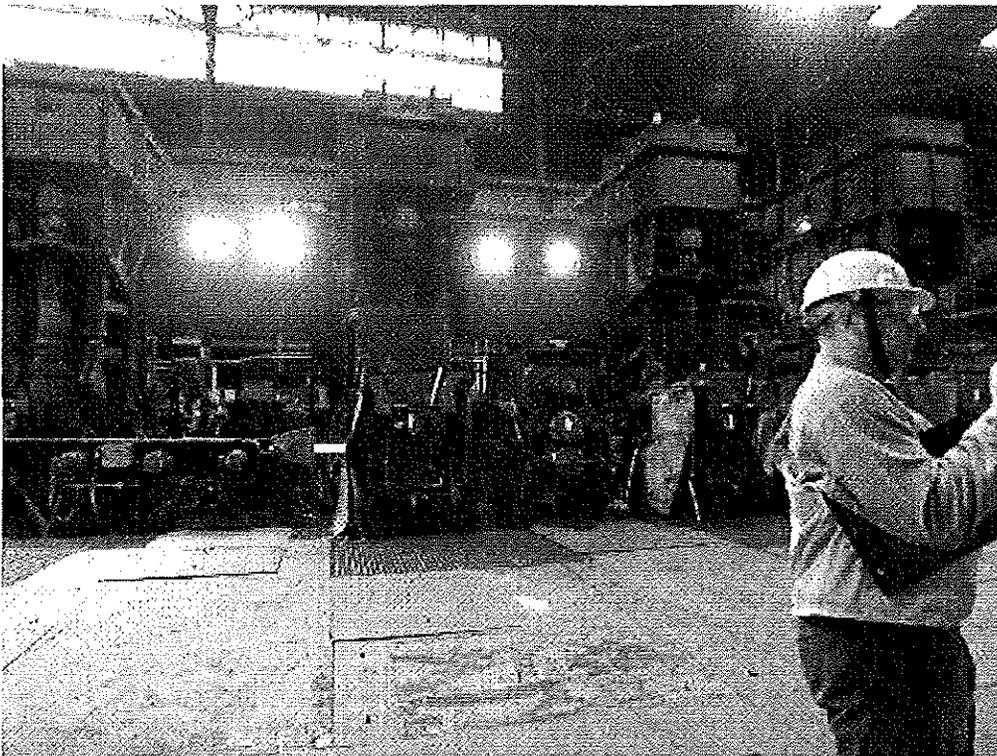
(DSC00095) : Photo of billet beginning to be reshaped after passing through one milling stand (Left side of photo red hot piece)
